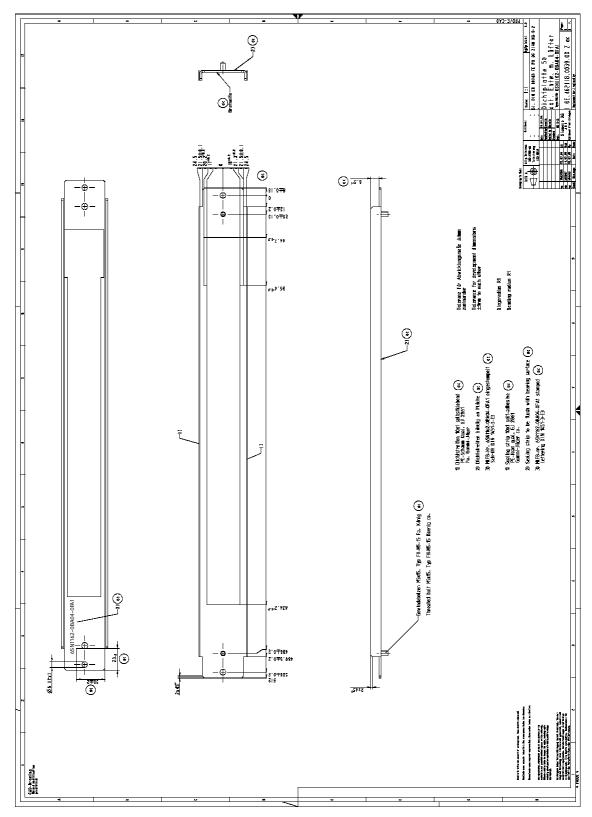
External cooling, mounting frame for cabinet installation module width 50 mm, 6SN1162-0BA04-0FA1
